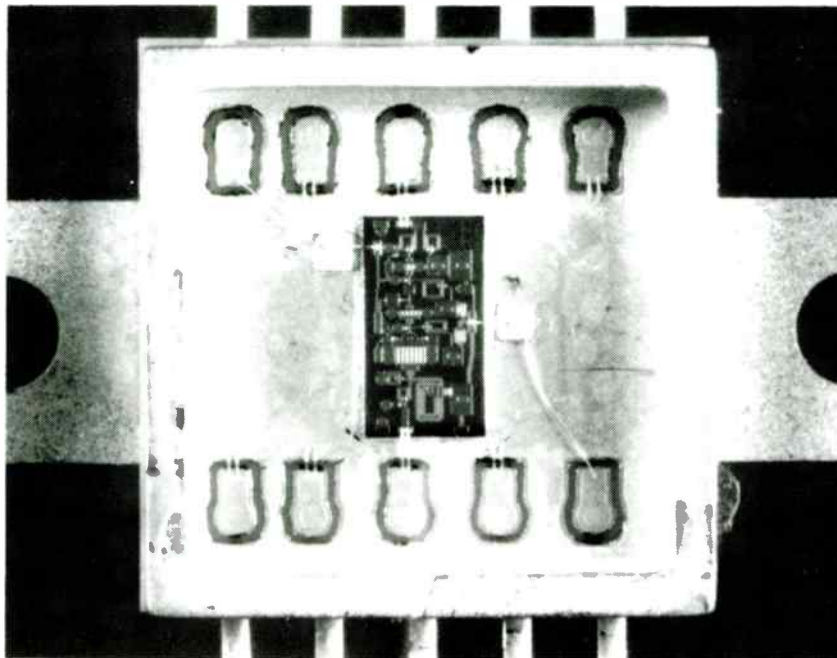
Photo of 2.4 GHz MMIC Assembly in Package
